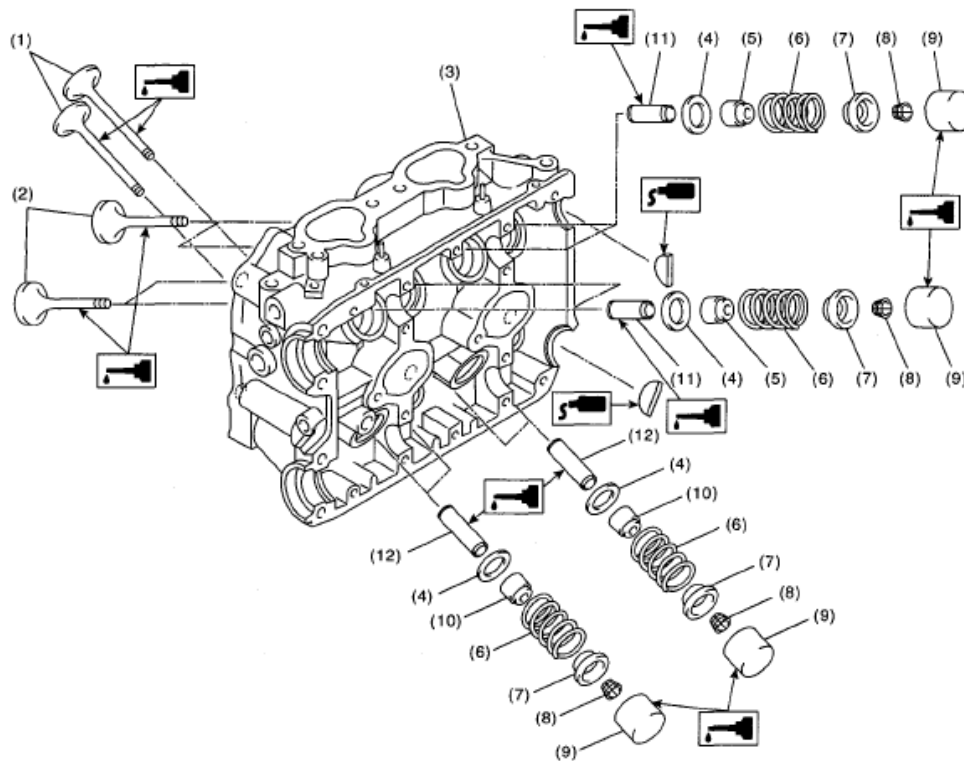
Identifying Valve And Valve Spring Using ST1 And ST2
